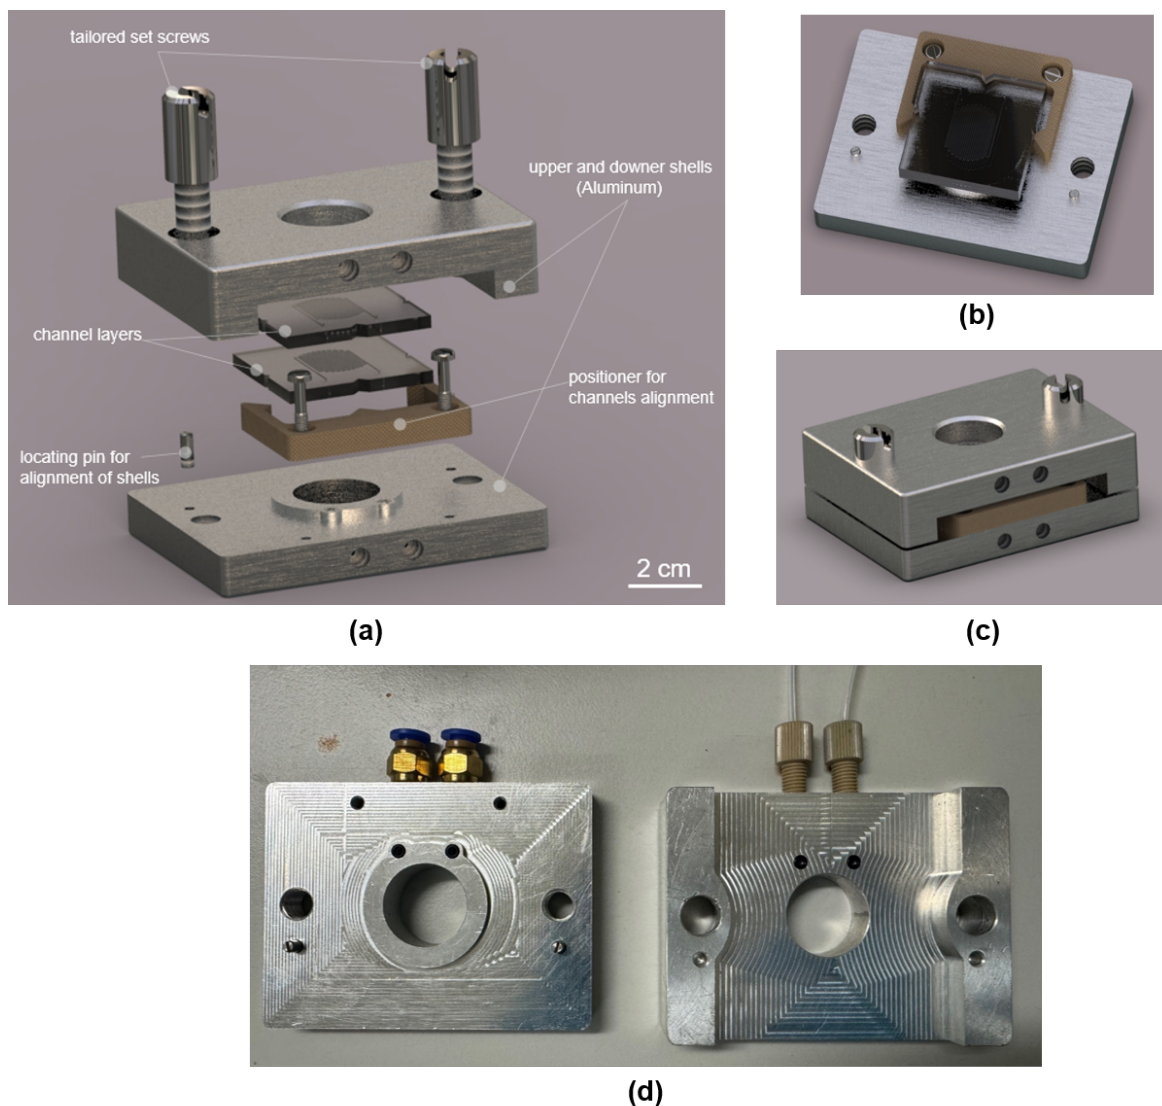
(a) Explosion view of the flat membrane gas-liquid contactor. (b) The channel layers aligned with the 3D-printed PEEK positioner. (c) 3D drawing of the assembled flat-membrane contactor. (d) Photo of the manufactured holder parts connected with fittings for gas and liquid solution.
